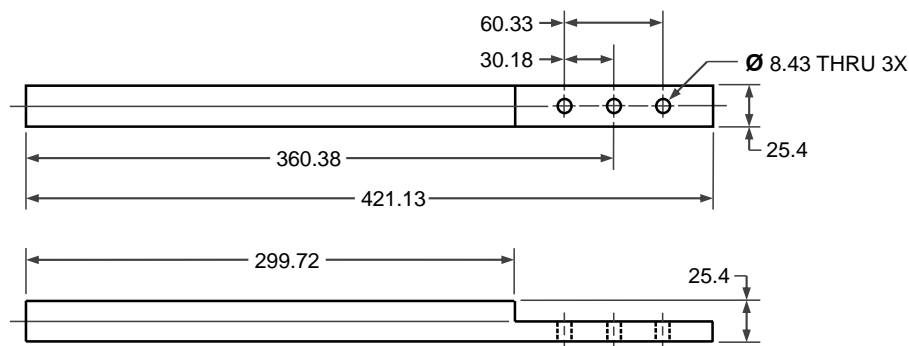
Drawing of component A of the Brake-Reuß beam. Components A and B are identical. Length units are in millimeters.
